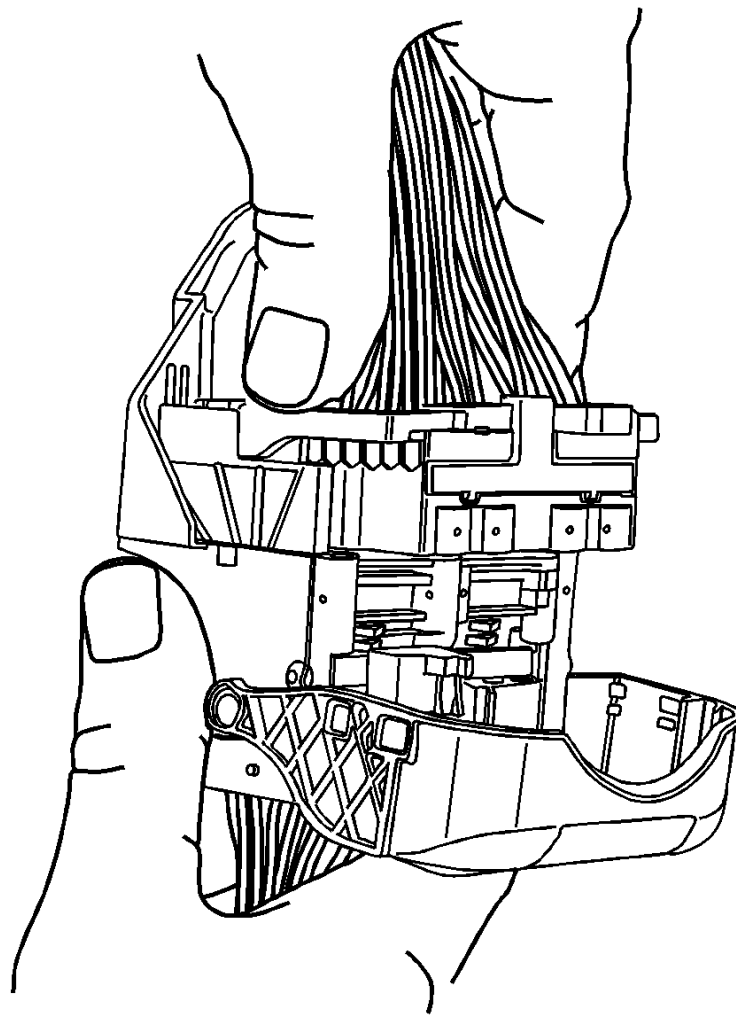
Assembled View Of Connector - Tyco/AMP (102-Way Inline)
